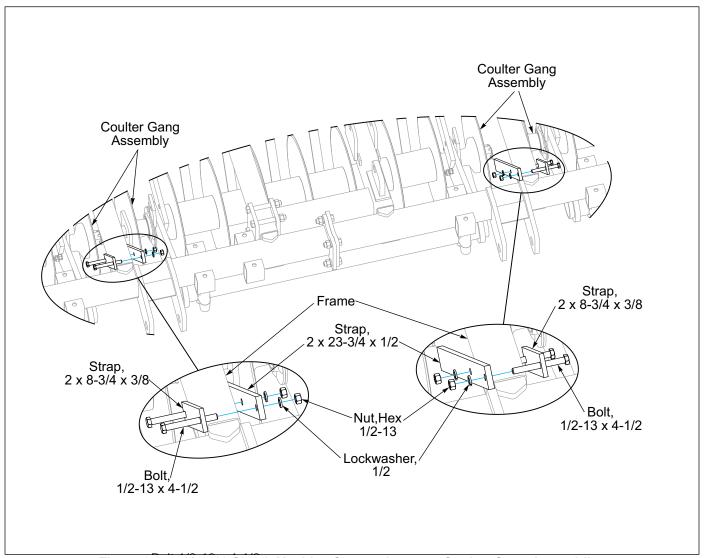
11 & 13 Shank Machine Scraper between Coulter Gang Assemblies
